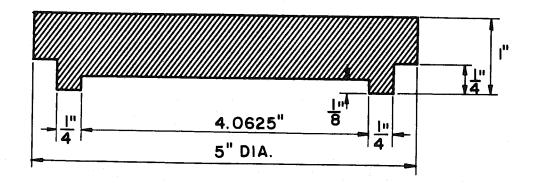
END PLATE FOR LOADING SHORT SPECIMENS
